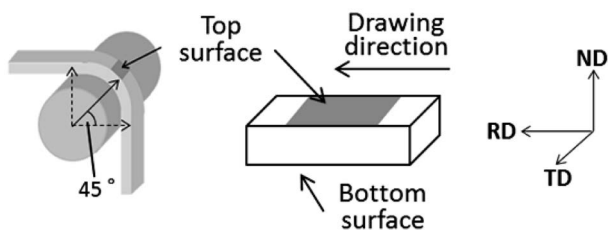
Schematic illustration of the test specimen indicating the top surface and bottom surface.
